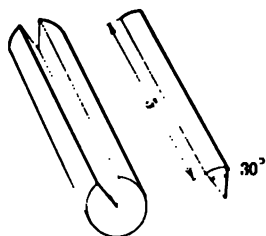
Miller's Specimen for Measuring Initial Stress in Brass Rods.
